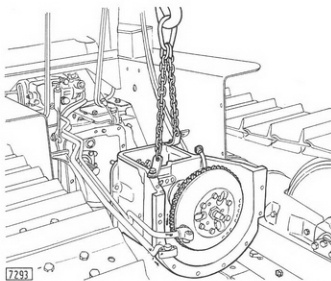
Removing (or Refitting) Gearbox/Clutch Assembly using Lifting Chain Part No. 291260
